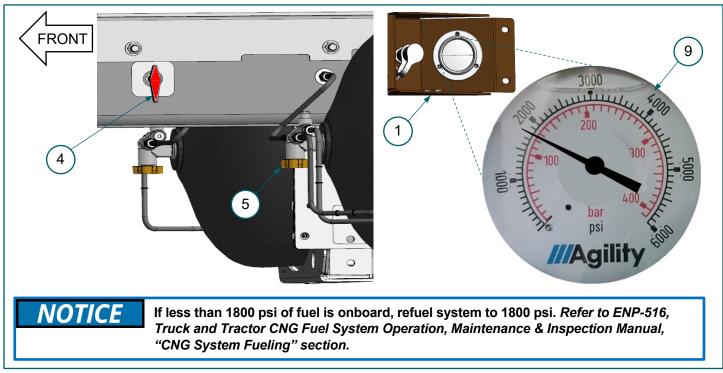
Fuel fill panel, (9) HP gauge reading 1800 psi, (4) 1/4-turn manual shutoff valve, (5) DS cylinder manual valve
